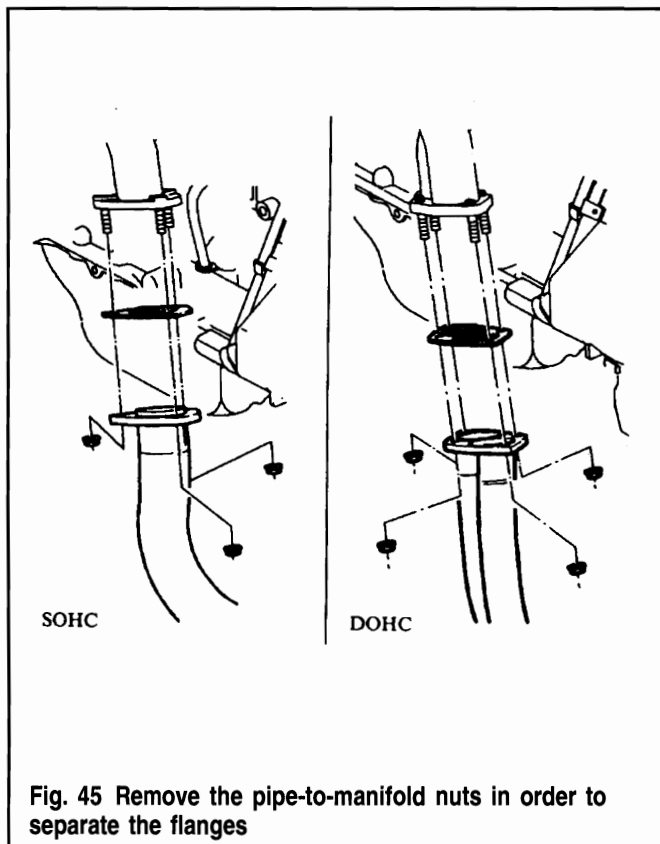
Remove the pipe-to-manifold nuts in order to separate the flanges
